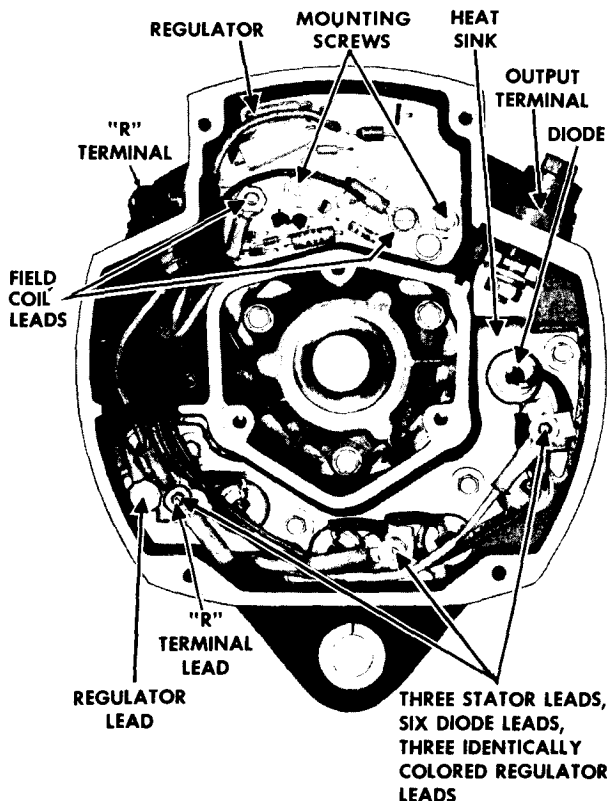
End view, cover removed, early type discrete-component 12-volt regulator
